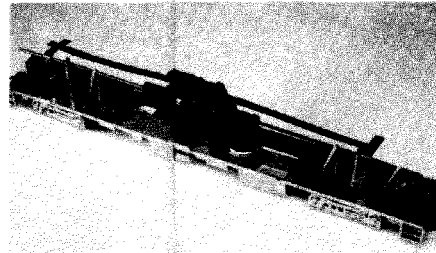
Push the spacers onto the axles. Again test the mechanism for smoothness. Do not allow the spacers to be pressed against the gearbox creating a bind.
